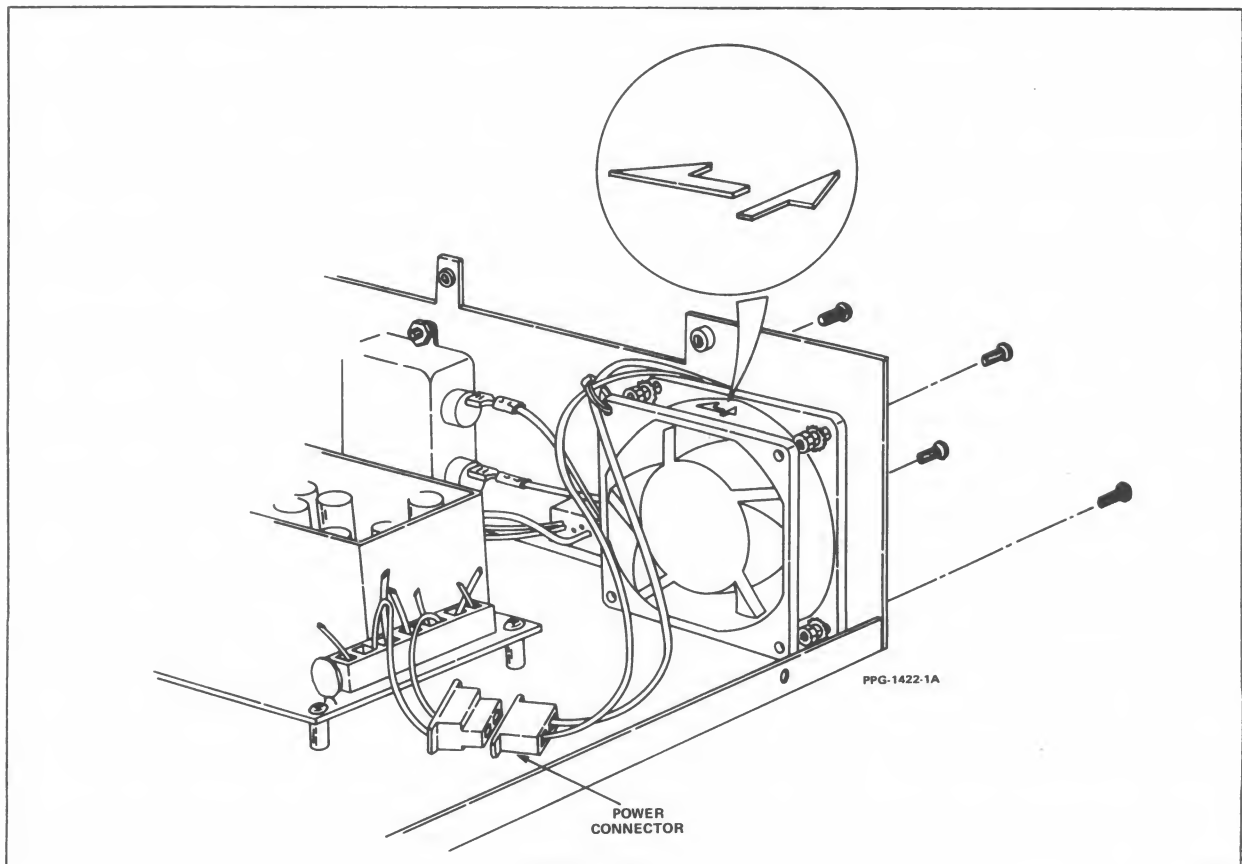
Tape Cartridge Drive Enclosure Fan Assembly
